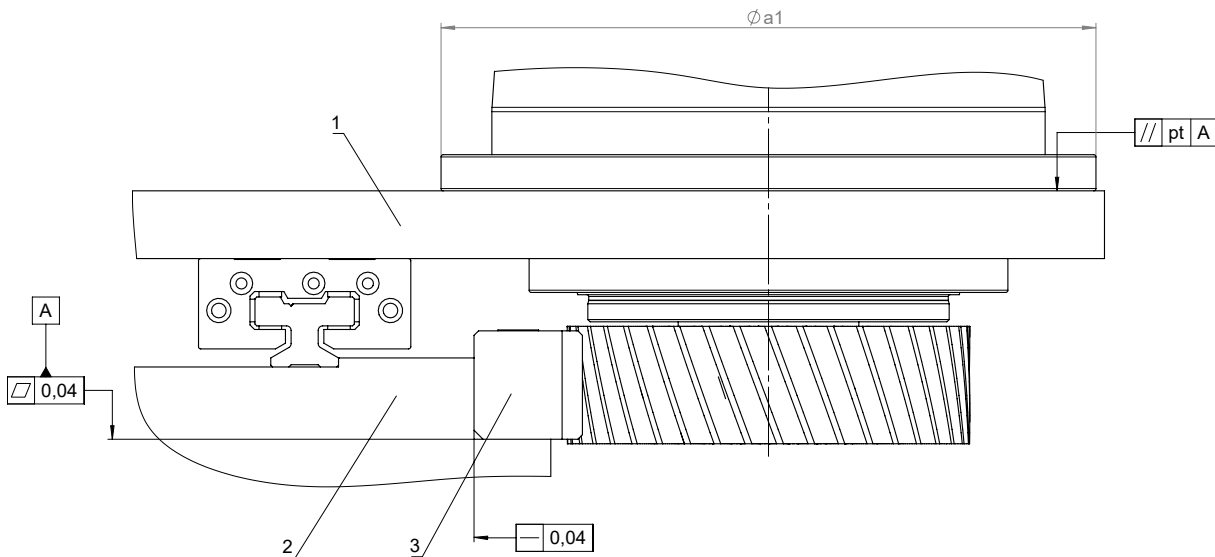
Shape and position tolerances for the connecting structure
